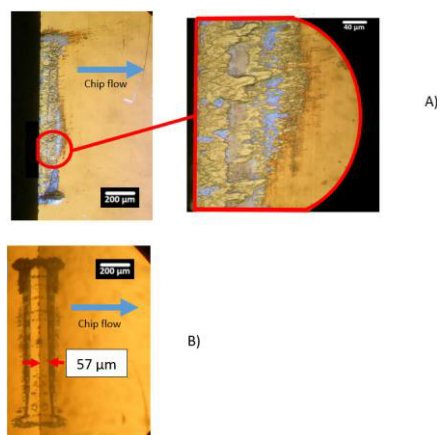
Rake face views. A) Coating top (free) side while it is illuminated from the bottom side with a small lamp. B) Coating bottom (YAG) side.
